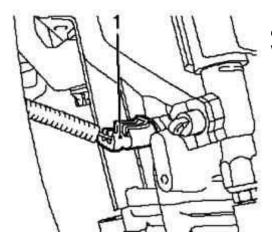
The wiring harness connector lamps reversing: 1 - the wiring harness connector
